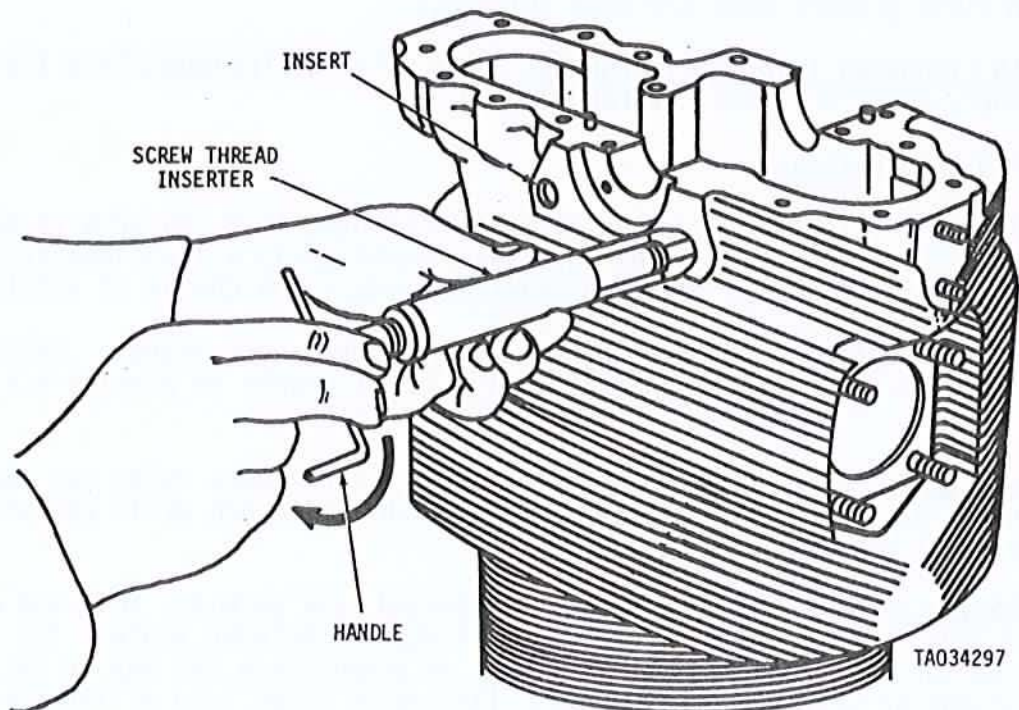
Installation of threaded insert in cylinder assembly using screw thread inserter.
